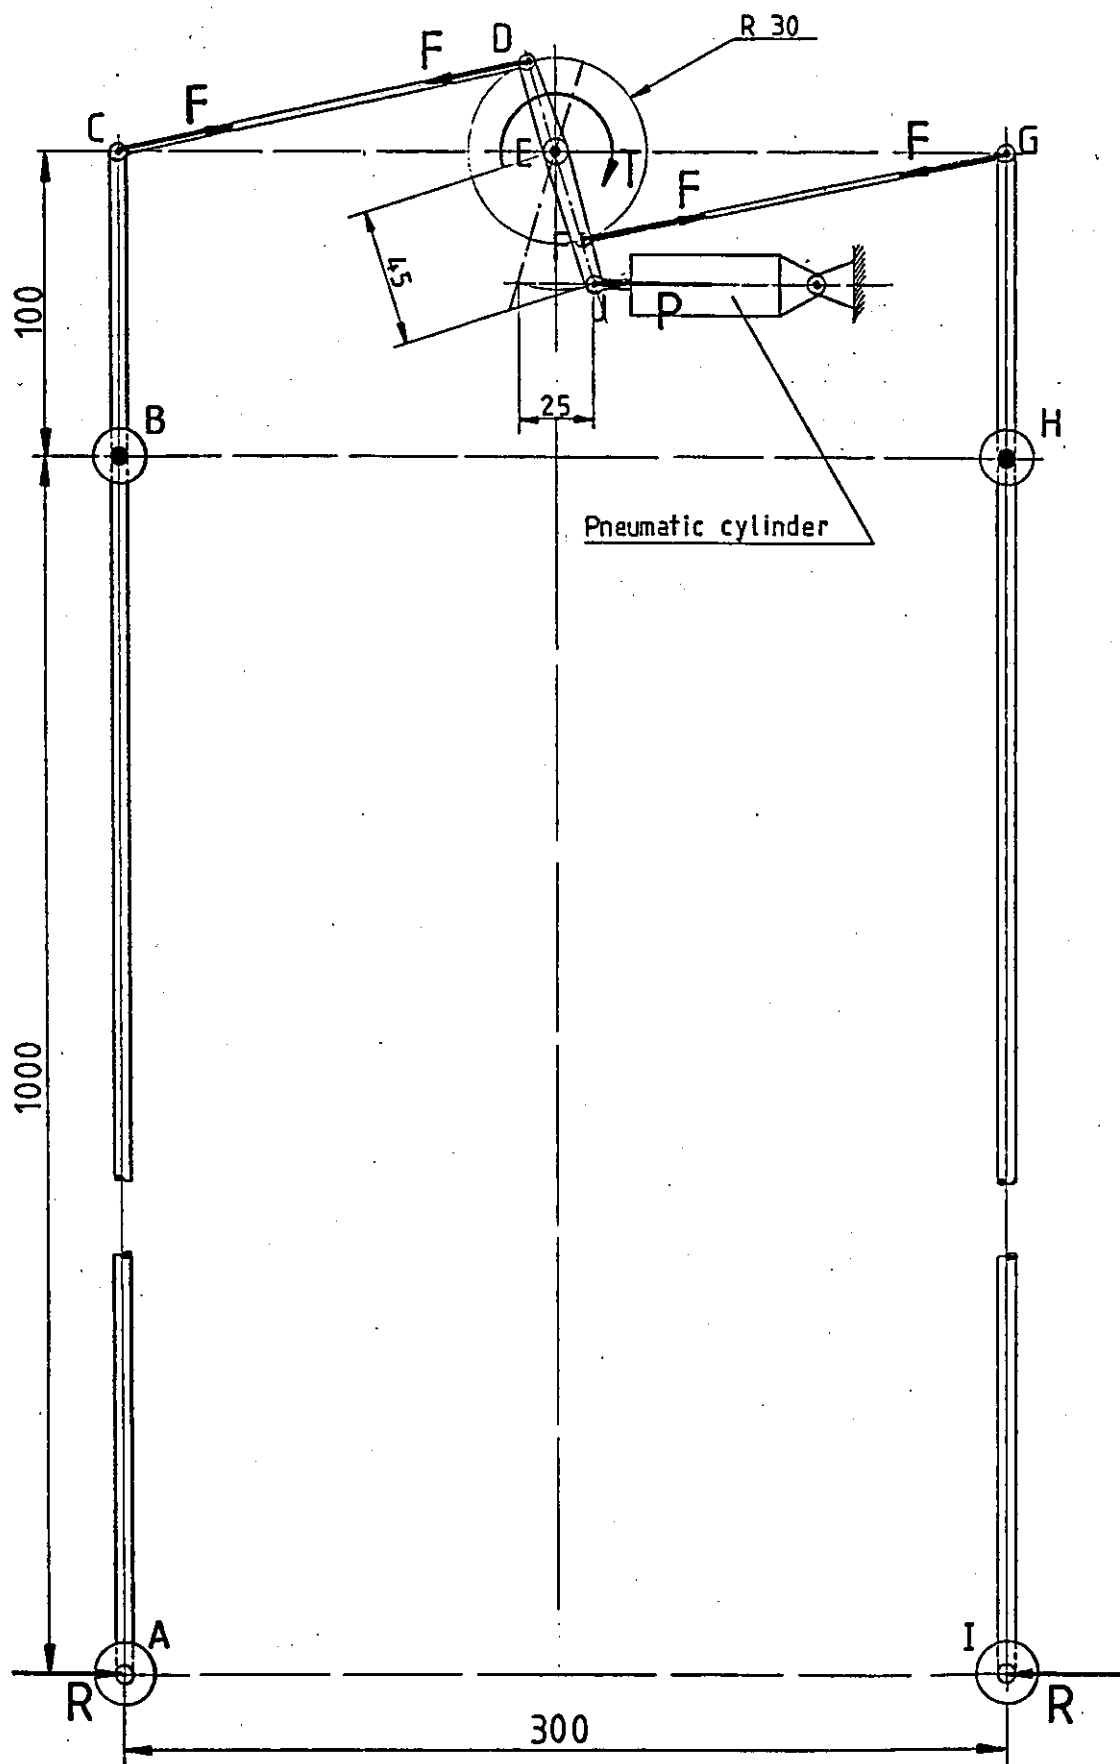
Swinging movement using double acting pneumatic cylinder.
